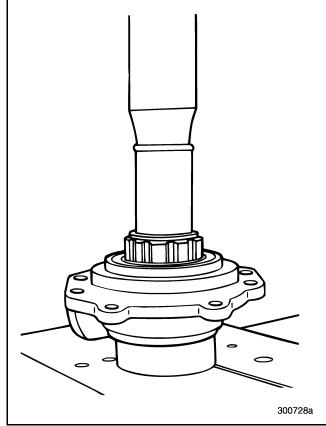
Installing Main Drive Pinion Assembly into Drive Pinion Bearing Cover
